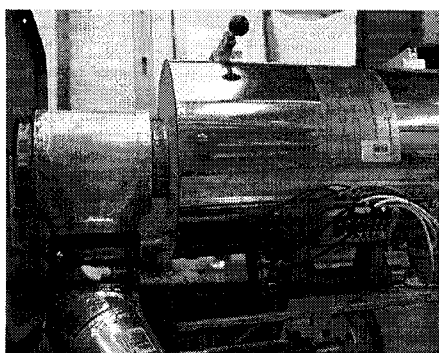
Detailed view of the purging collar located between the first and second ovens.
